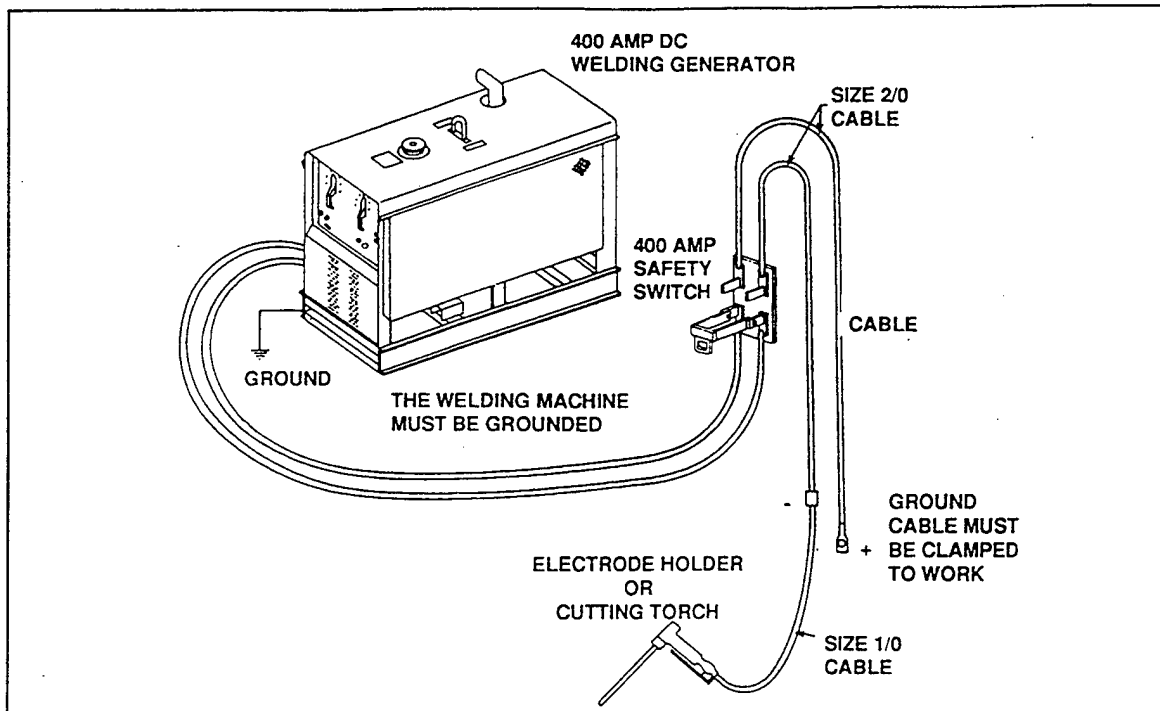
Sketch of the welding and safety equipment configuration for Underwater welding and cutting.
